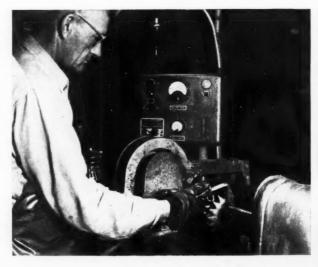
The Magnaflux method is used to determine the soundness of a cross roller for a rock bit.
